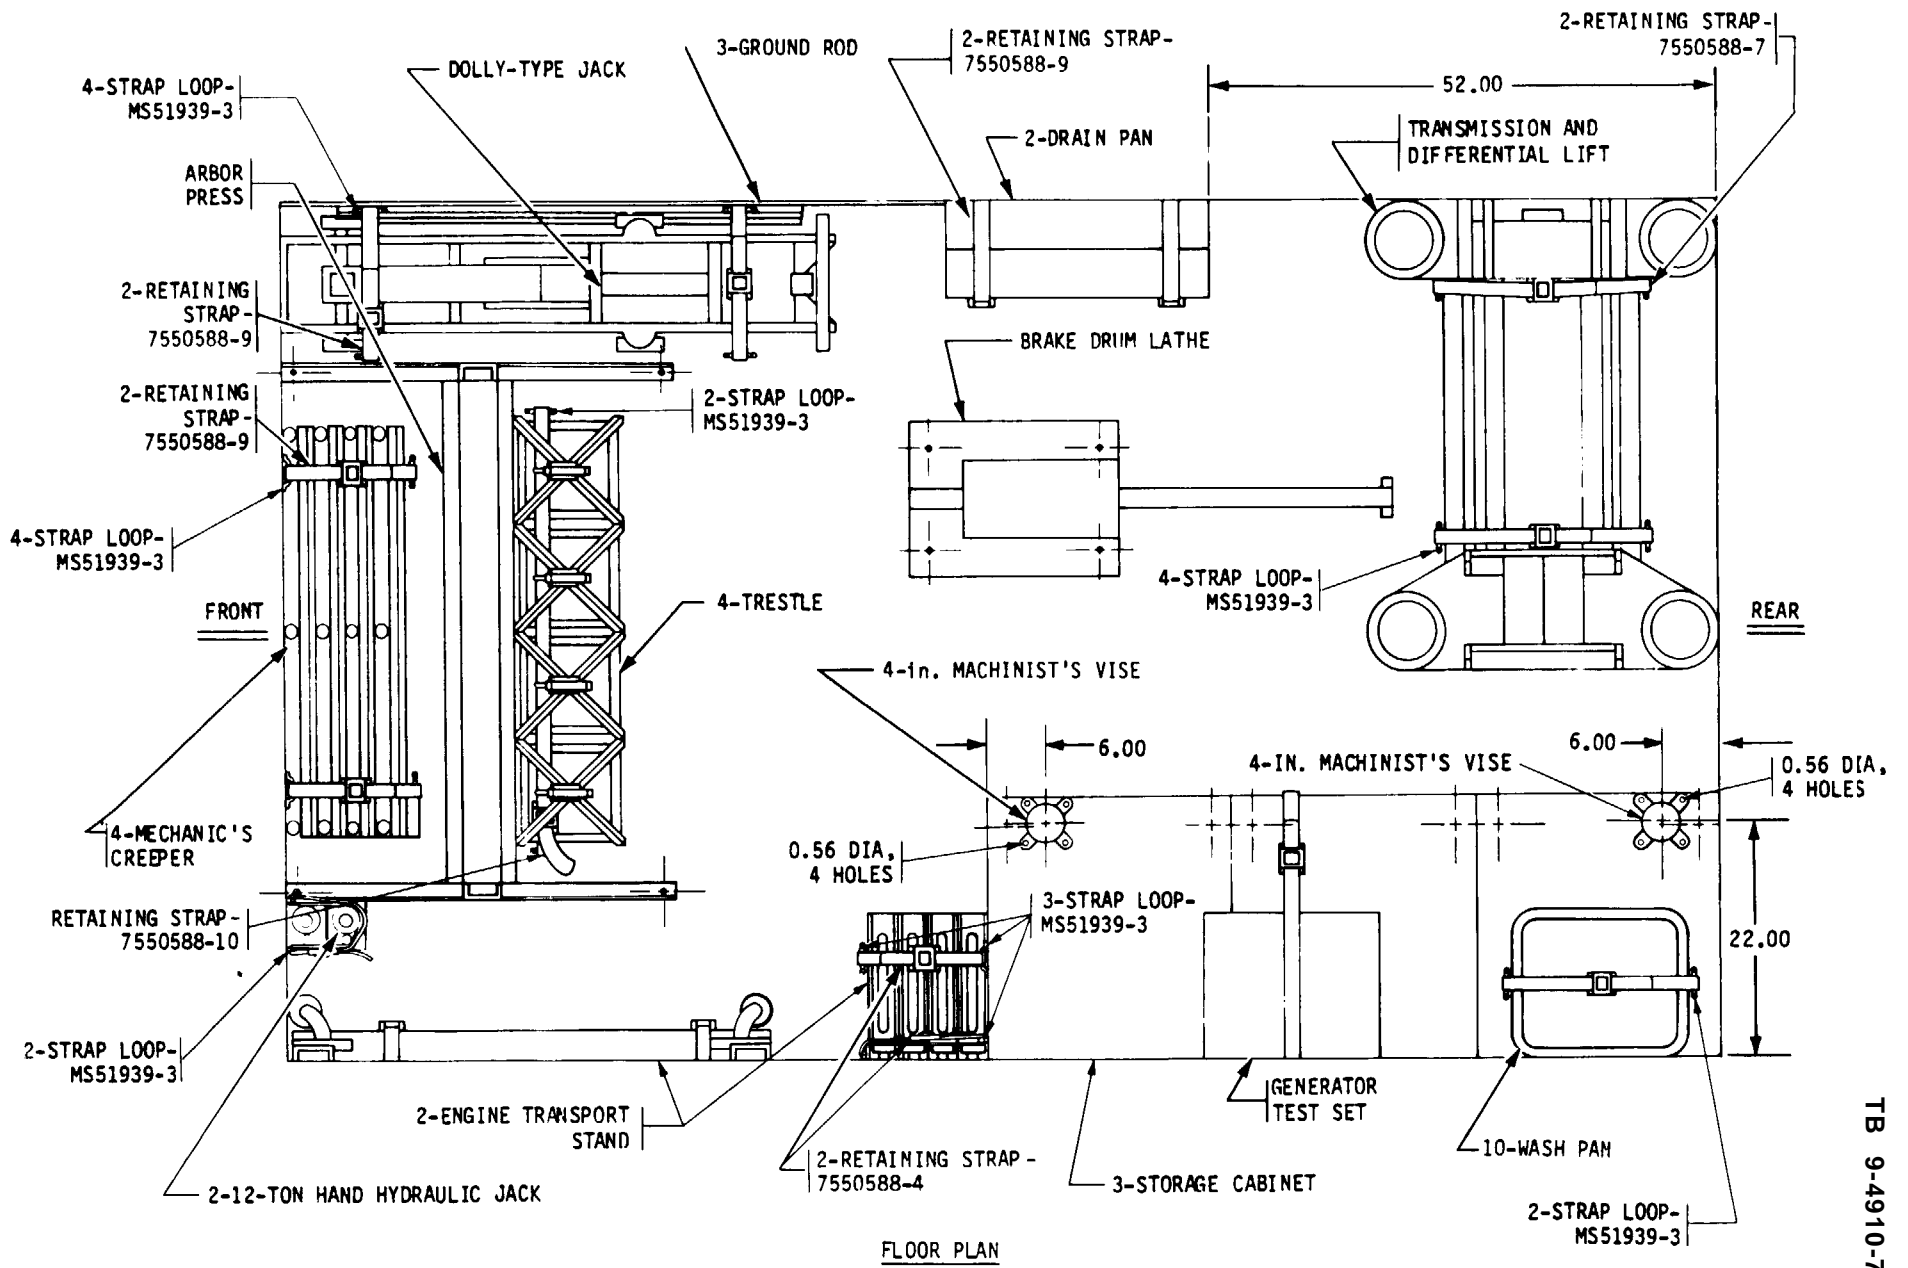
Components to be Mounted, Unit 2, M35A2, Floor Plan.
